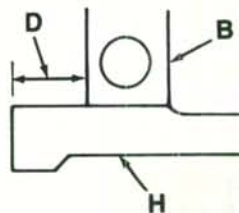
Refer to text after reassembling intermediate housing. Measure distance (D) between surface of intermediate housing (H) and surface of drive shaft front bearing (B) to determine if a shim is needed between front cover and bearing.
